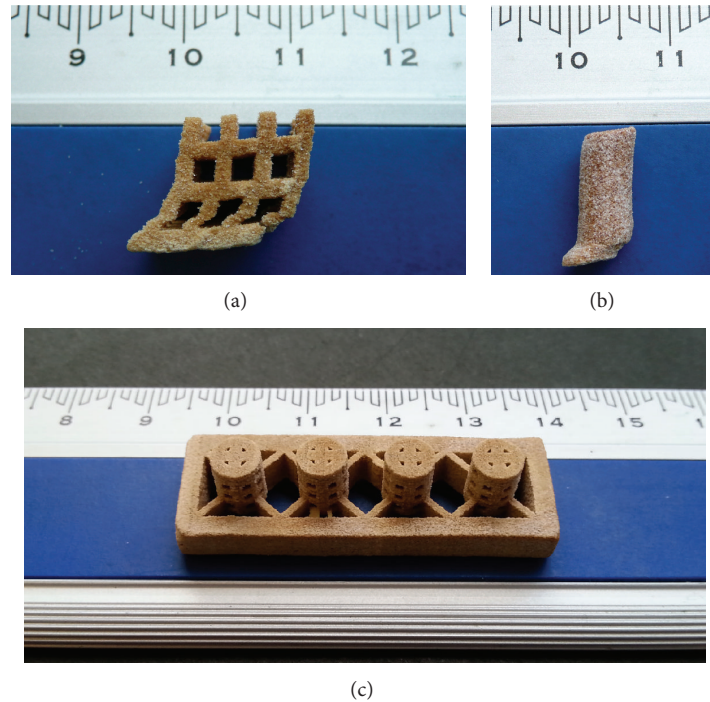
((a), (b)) Ill-defined ceramic parts built without support structure distorted in the 3D printing process. (c) Parts designed with support structure.
